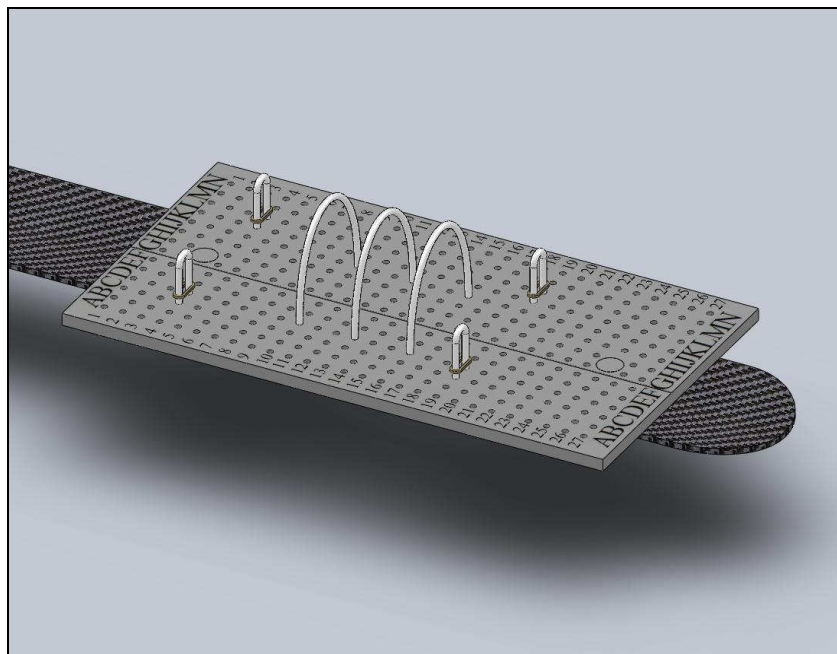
This is an isometric view of the finished peg board attached to the scanner bed.
